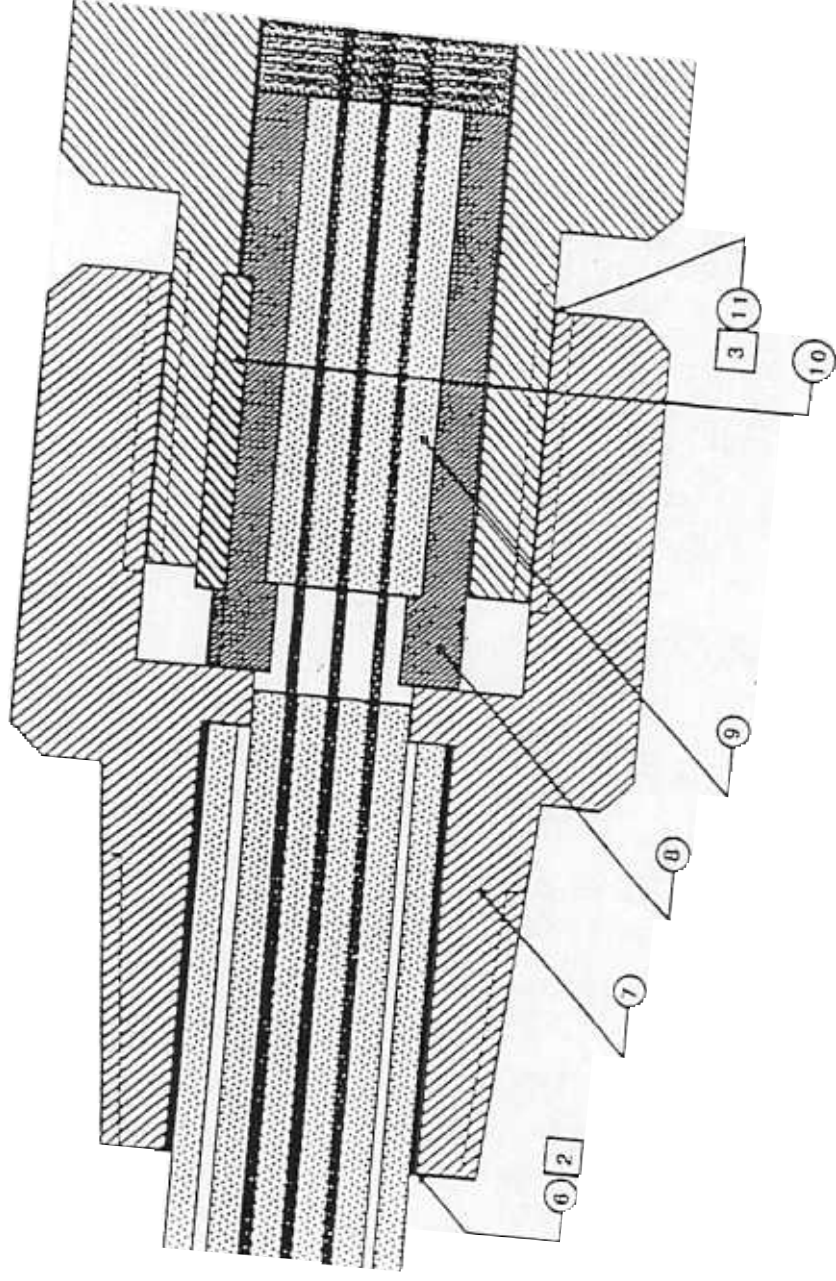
Drawing showing connector detail for melt tank sensor NOTE: See Section 5.1 for Corning specifications
